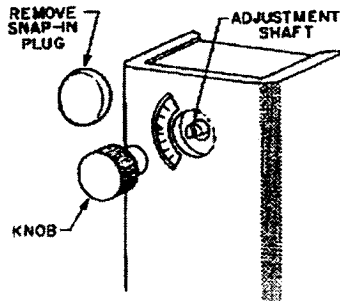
Drawing showing snap-in plug removed and the knob in line to assemble. Press the knob onto the slotted shaft.
